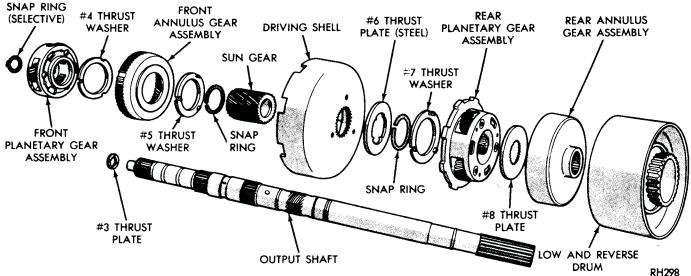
Planetary Gear Train and Output Shaft (A-727)
